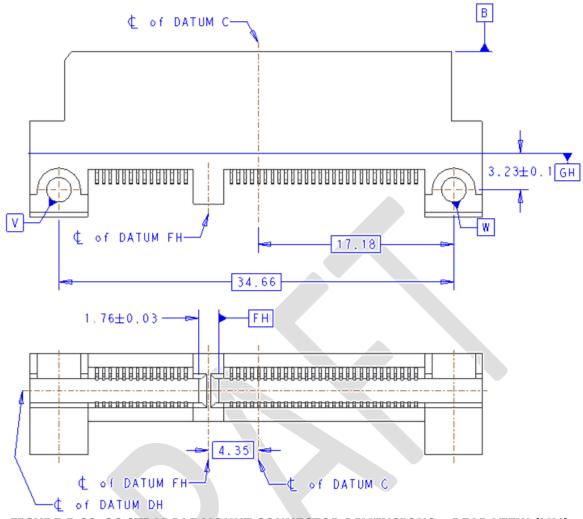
2C STRADDLE MOUNT CONNECTOR DIMENSIONS – REAR VIEW (MM)
